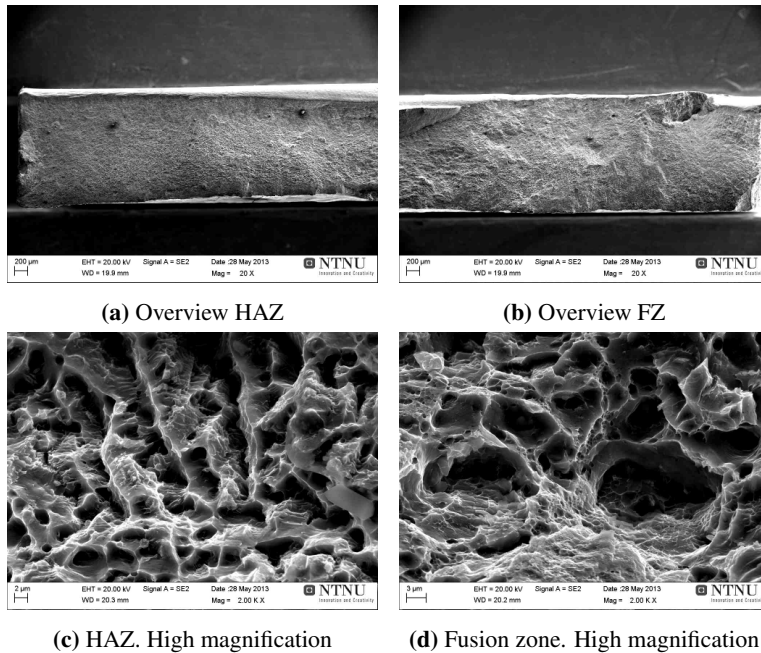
Fracture surfaces of the HAZ tensile specimen orientated longitudinal to the welding direction.
